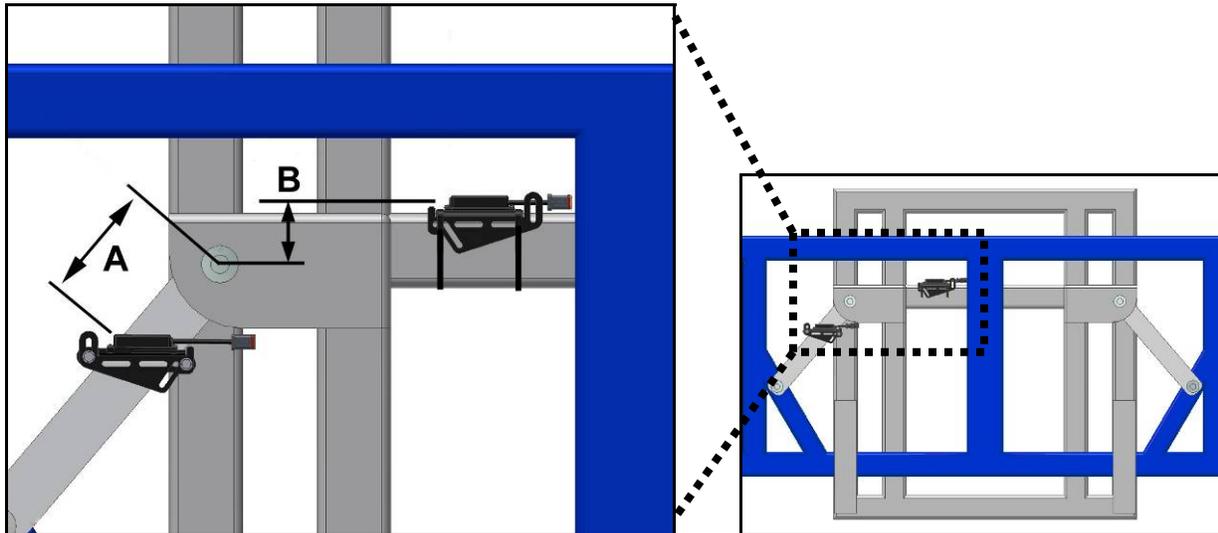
Roll Sensor Mounting on a Trapeze Suspended Boom
